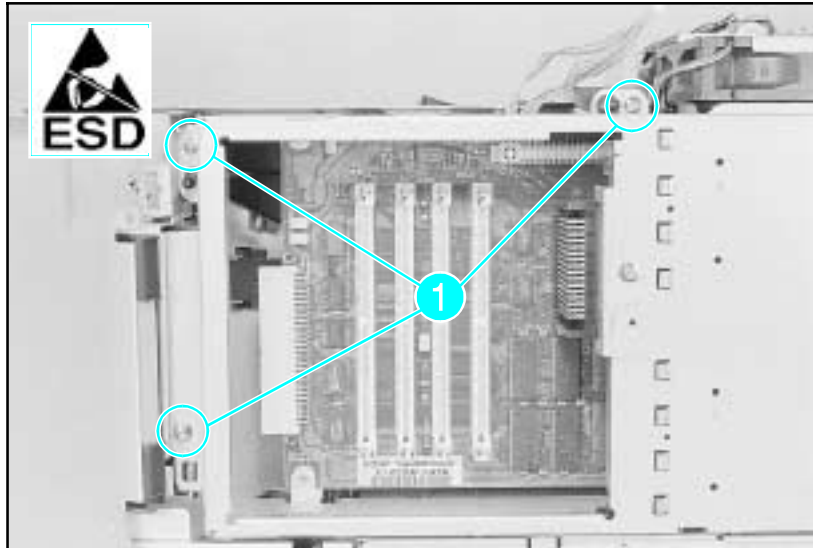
Formatter Cage Screws (Right Side View - LaserJet 4 Plus)
